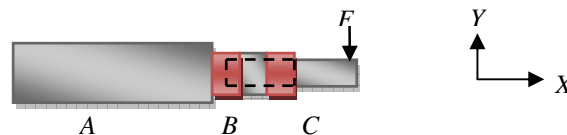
A simple schematic drawing of cutting tool system (A) Spindle, (B) periodic tool holder, and (C) cutting tool
